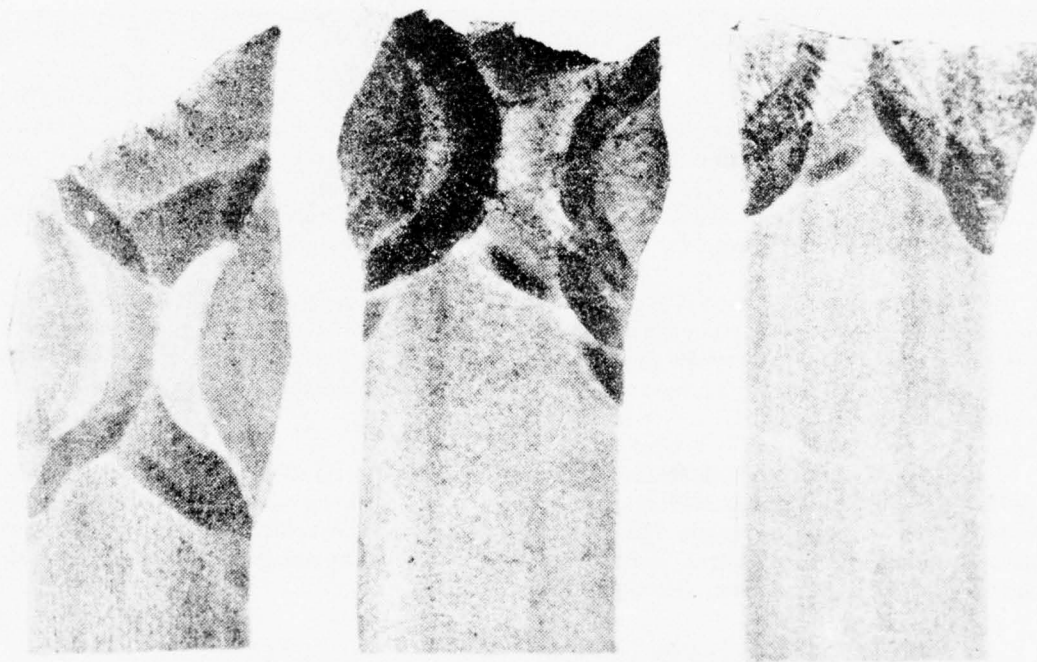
Fracture modes in weldments of high strength steels—ductile fracture in base metal, brittle fracture of heat-affected zone, and brittle fracture of weld.
